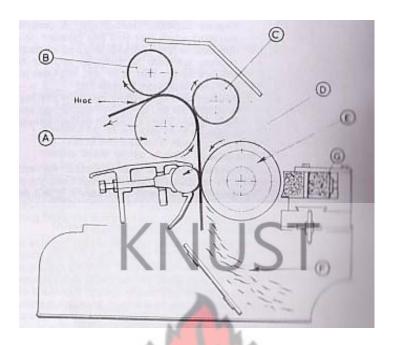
Rubber roll fleshing machine Source: Sharphouse (1983)
